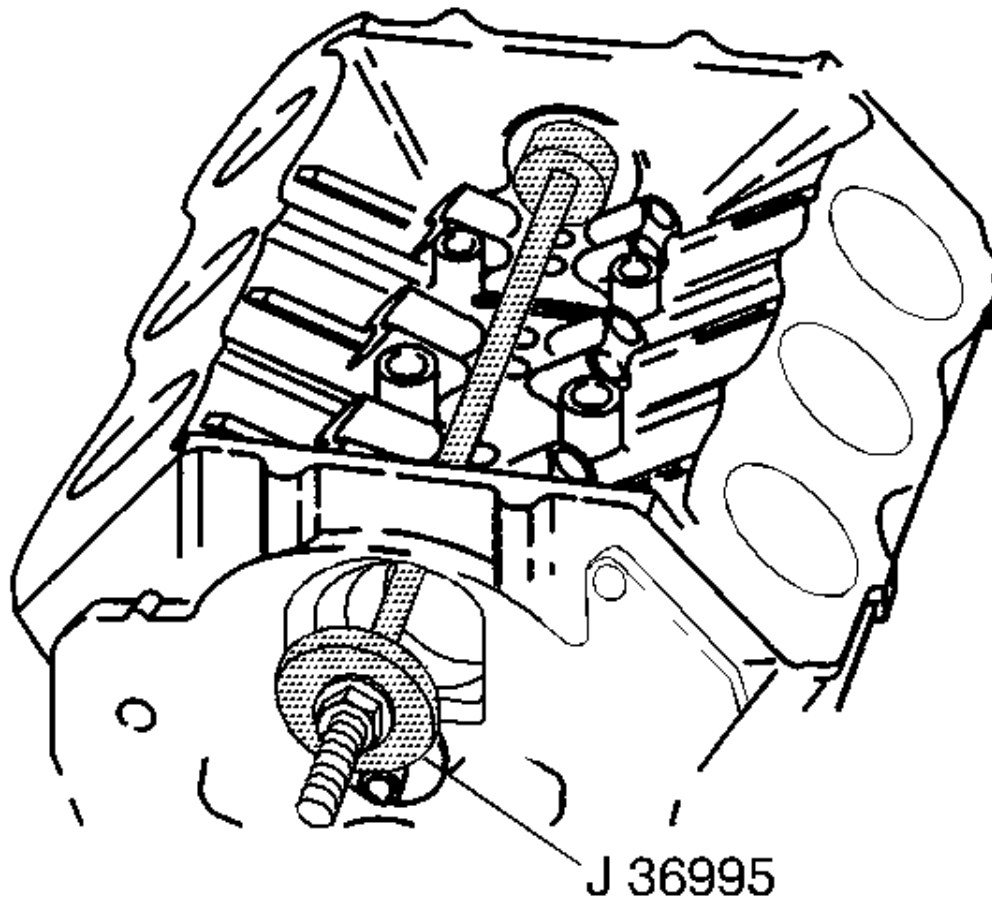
Removing Balance Shaft Bearing & Balance Shaft Bushing
